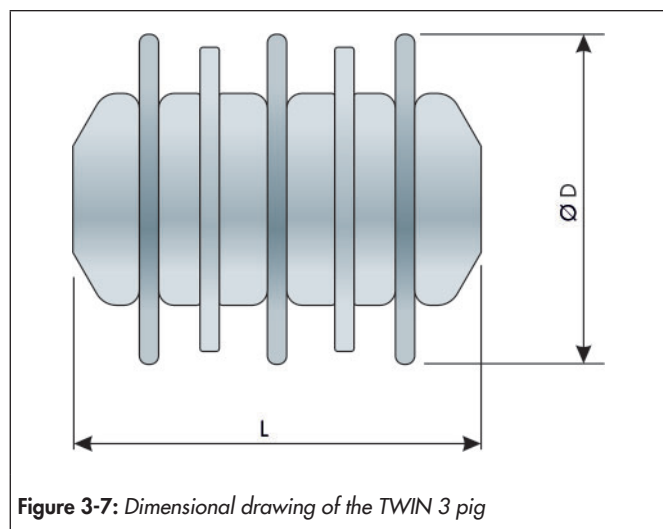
Dimensional drawing of the TWIN 3 pig
